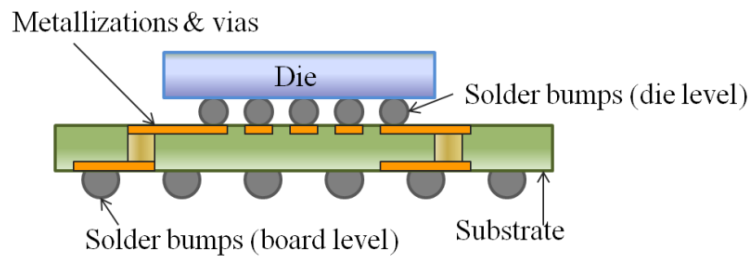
Schematic cross-sectional view of a flip-chip package.
